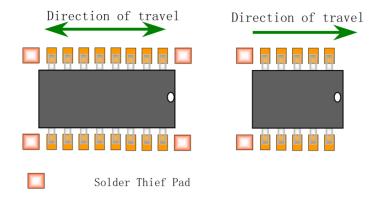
Solder thief pad placement for SOP packages undergoing wave soldering.
